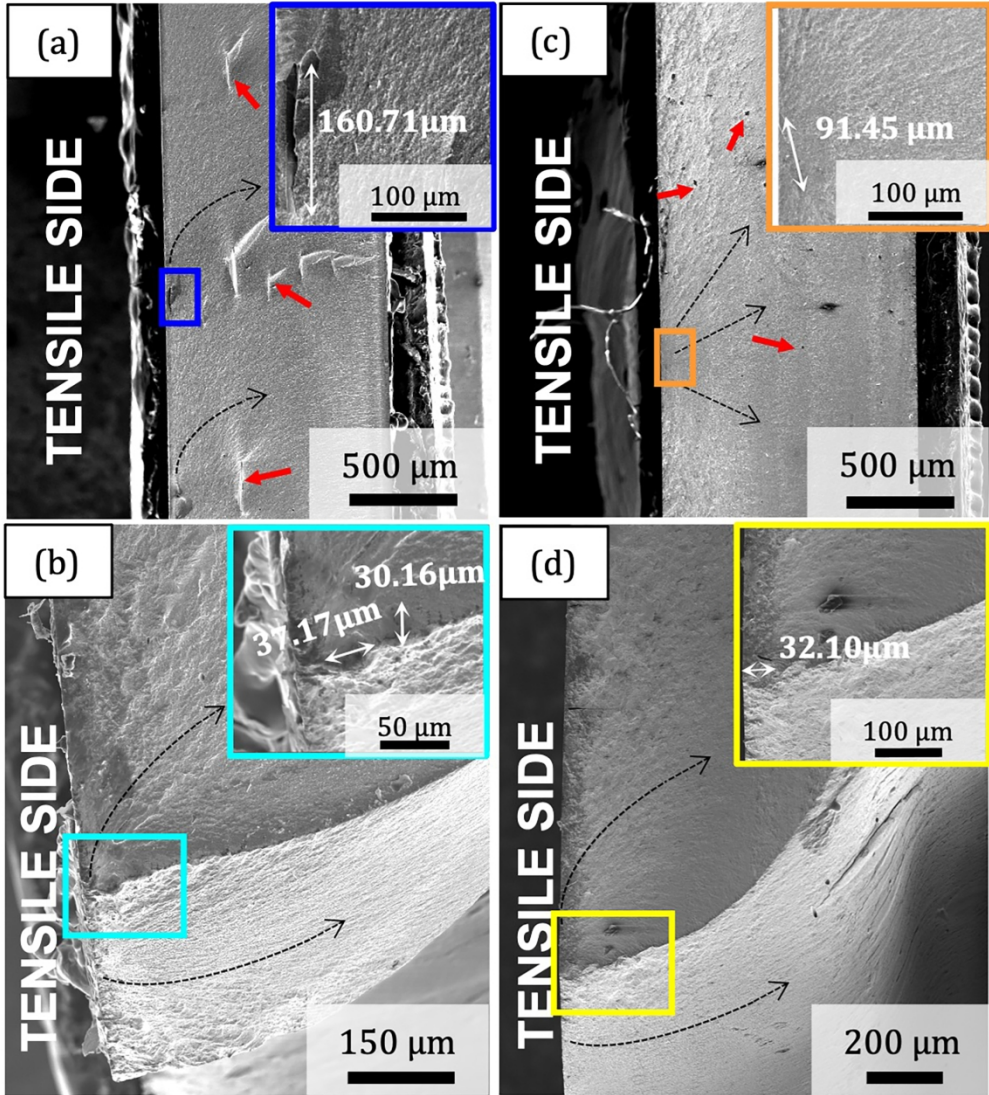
Secondary electron (SE) images of the biaxial fracture surface of 3Y-TZP discs manufactured by MEX using printing strategy 01 100 30 (a,b) and 02 110 30 (c,d). Indicative measurements of the critical flaw size.
